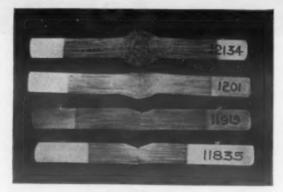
From bottom to top, these sections were Uniwelded with increasing amount of gather.
